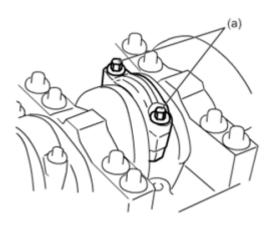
Identifying Connecting Rod Bearing Cap Installation Position Courtesy of SUZUKI OF AMERICA CORP.
